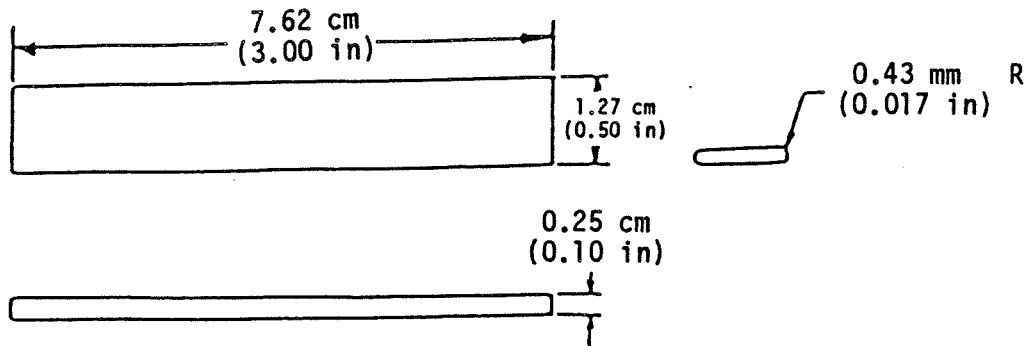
Specimen Designs of the Substrates for Coating Material Mechanical Property Tests
